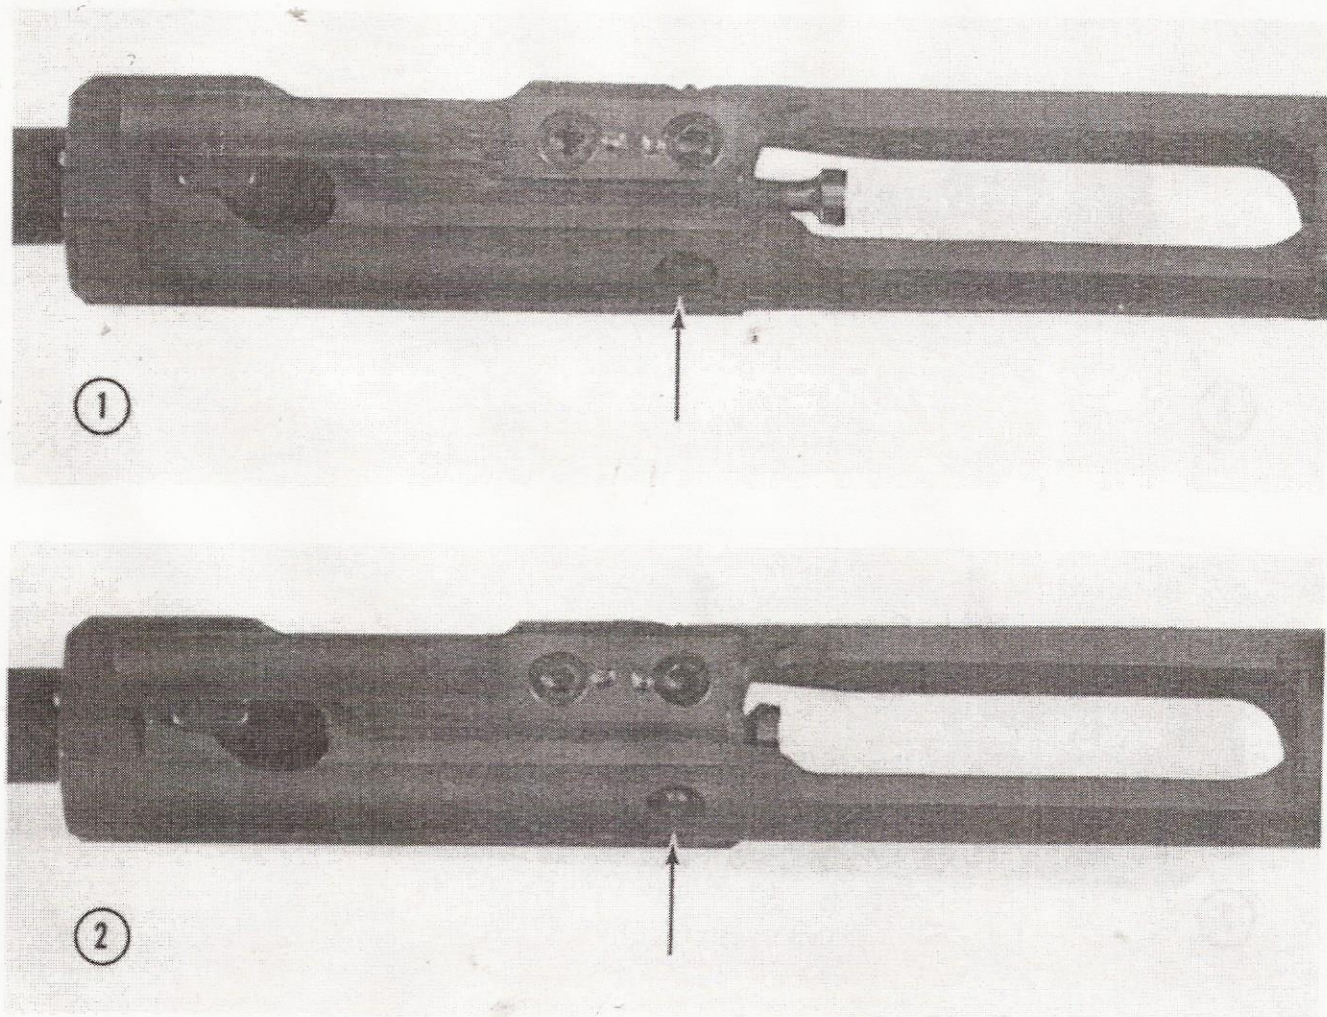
Arrows indicate location of pin which retains the firing pin in the bolt carrier. Top—retaining pin has been incorrectly assembled ahead of the firing pin shoulder. Bottom—correct assembly will avoid failure to fire.
